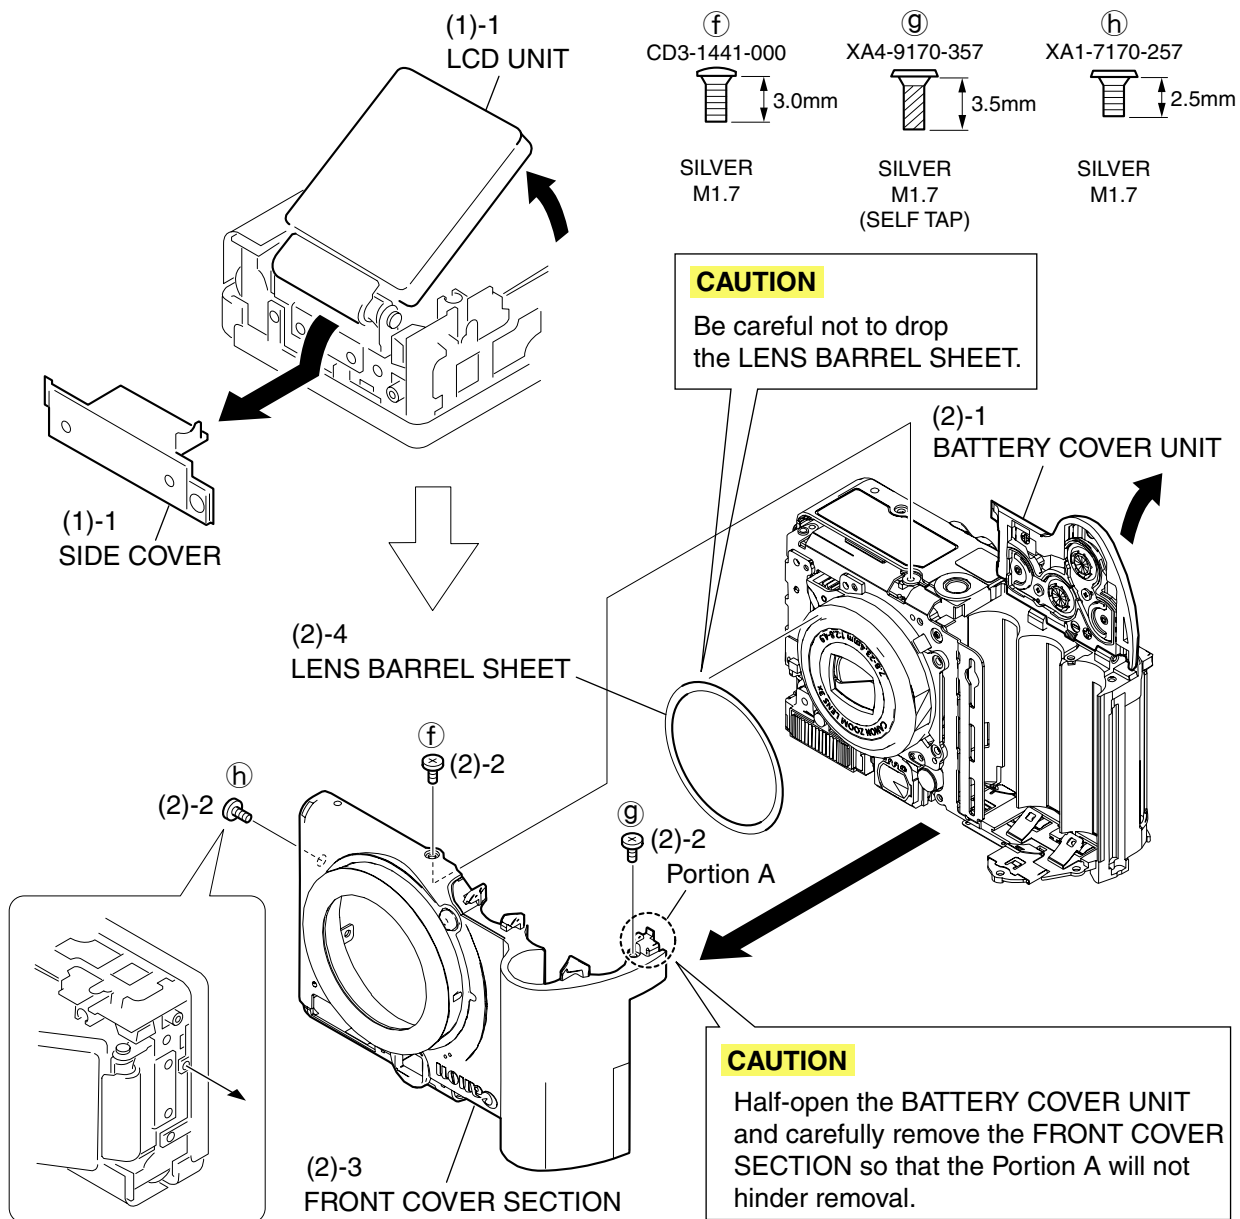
SIDE COVER, FRONT COVER SECTION, LENS BARREL SHEET
